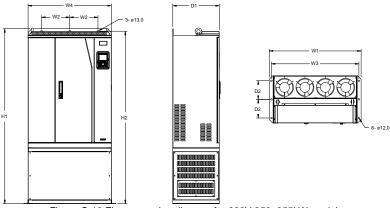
Floor mounting diagram for 660V 250-355kW models
